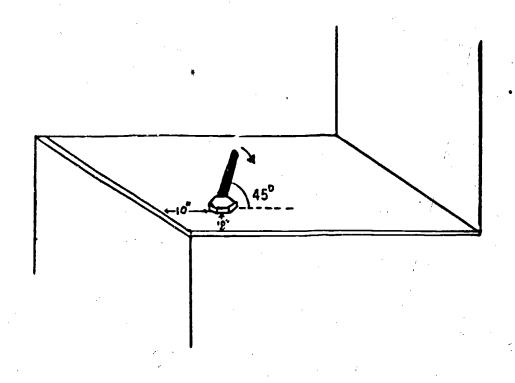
Diagram of where 1" bolt should be welded onto the shelve(s).
